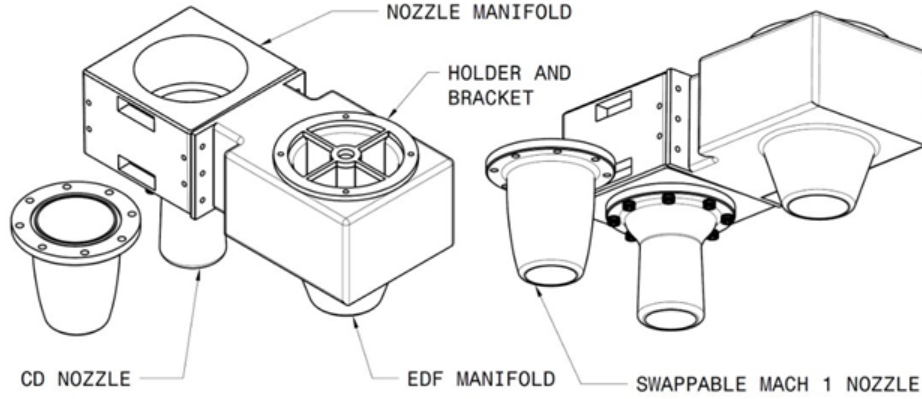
The finalized design for the full nozzle/EDF mount, featuring both manifolds.
